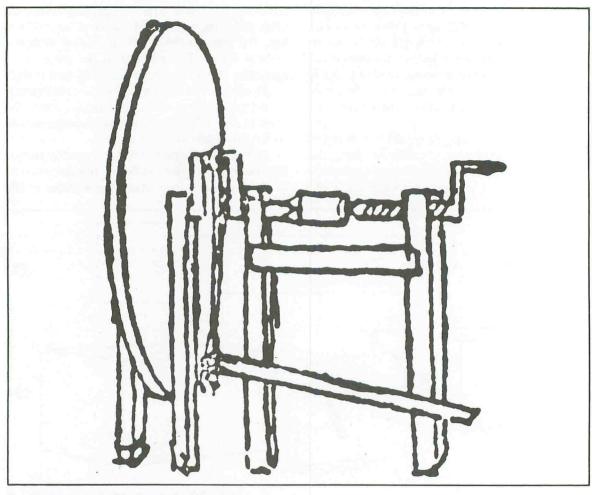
Leonardo Da Vinci's spindle driven lathe.
